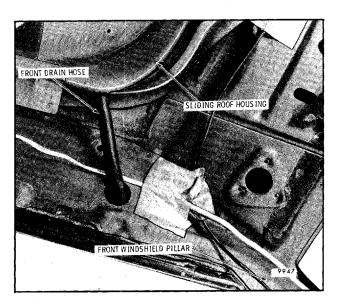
Front Drain Tube Connected to Drain Outlet
